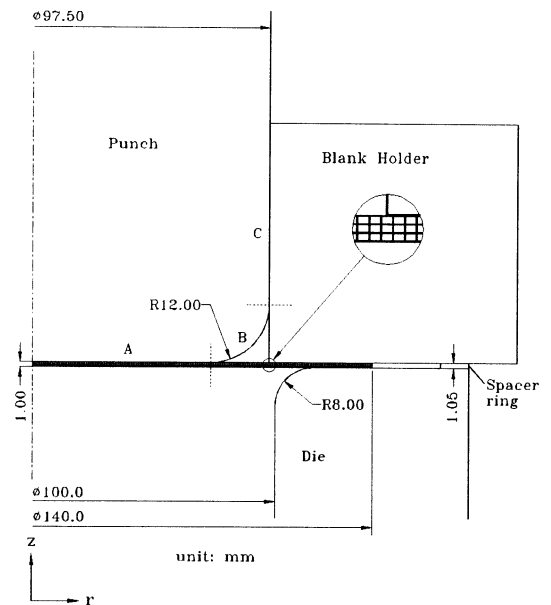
Tools' dimensions and finite-element mesh of the blank for the cylindrical cup drawing process.
